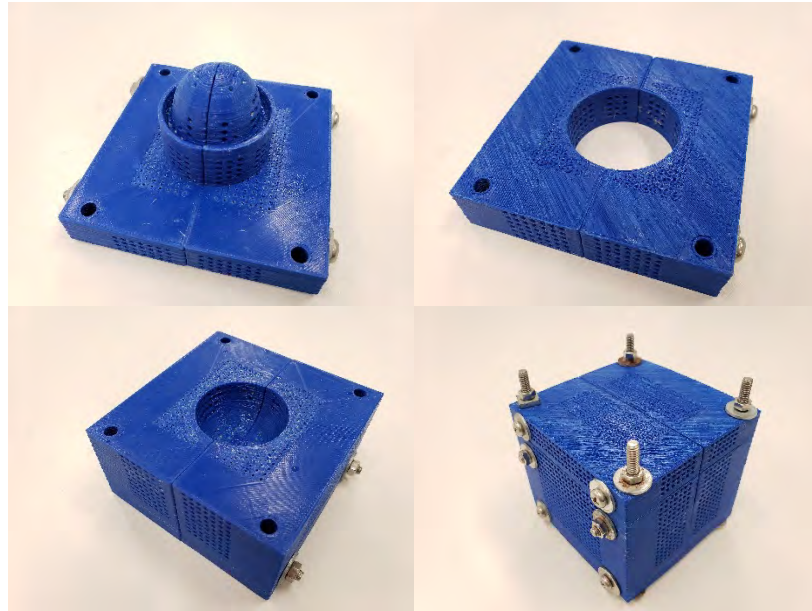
Three parts of the mould: top mould (top-left), middle mould (top-right), bottom mould (bottom-left); the three parts of the mould are put together with bolts and nuts to form the complete mould (bottom-right).
